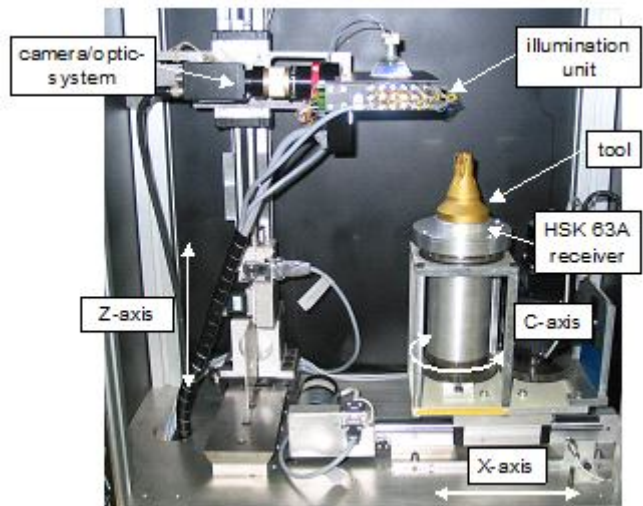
Machine vision prototype for tool wear inspection.
